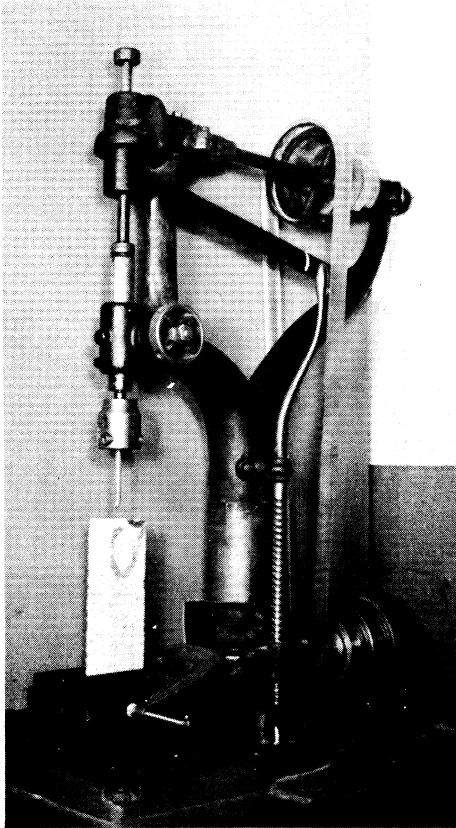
Drilling Hole in One End of Specimen for Cementing Steel Plug.
